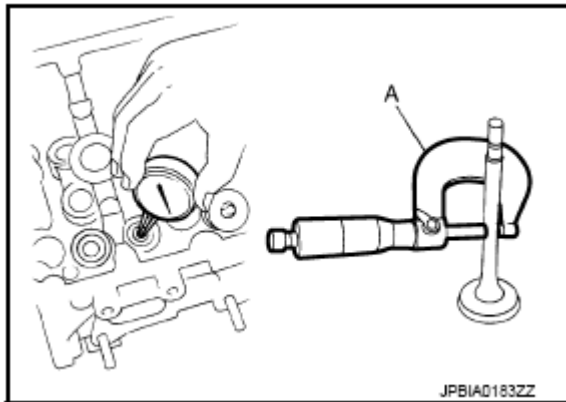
Measuring Inner Diameter Of Valve Guide Using Bore Gauge
